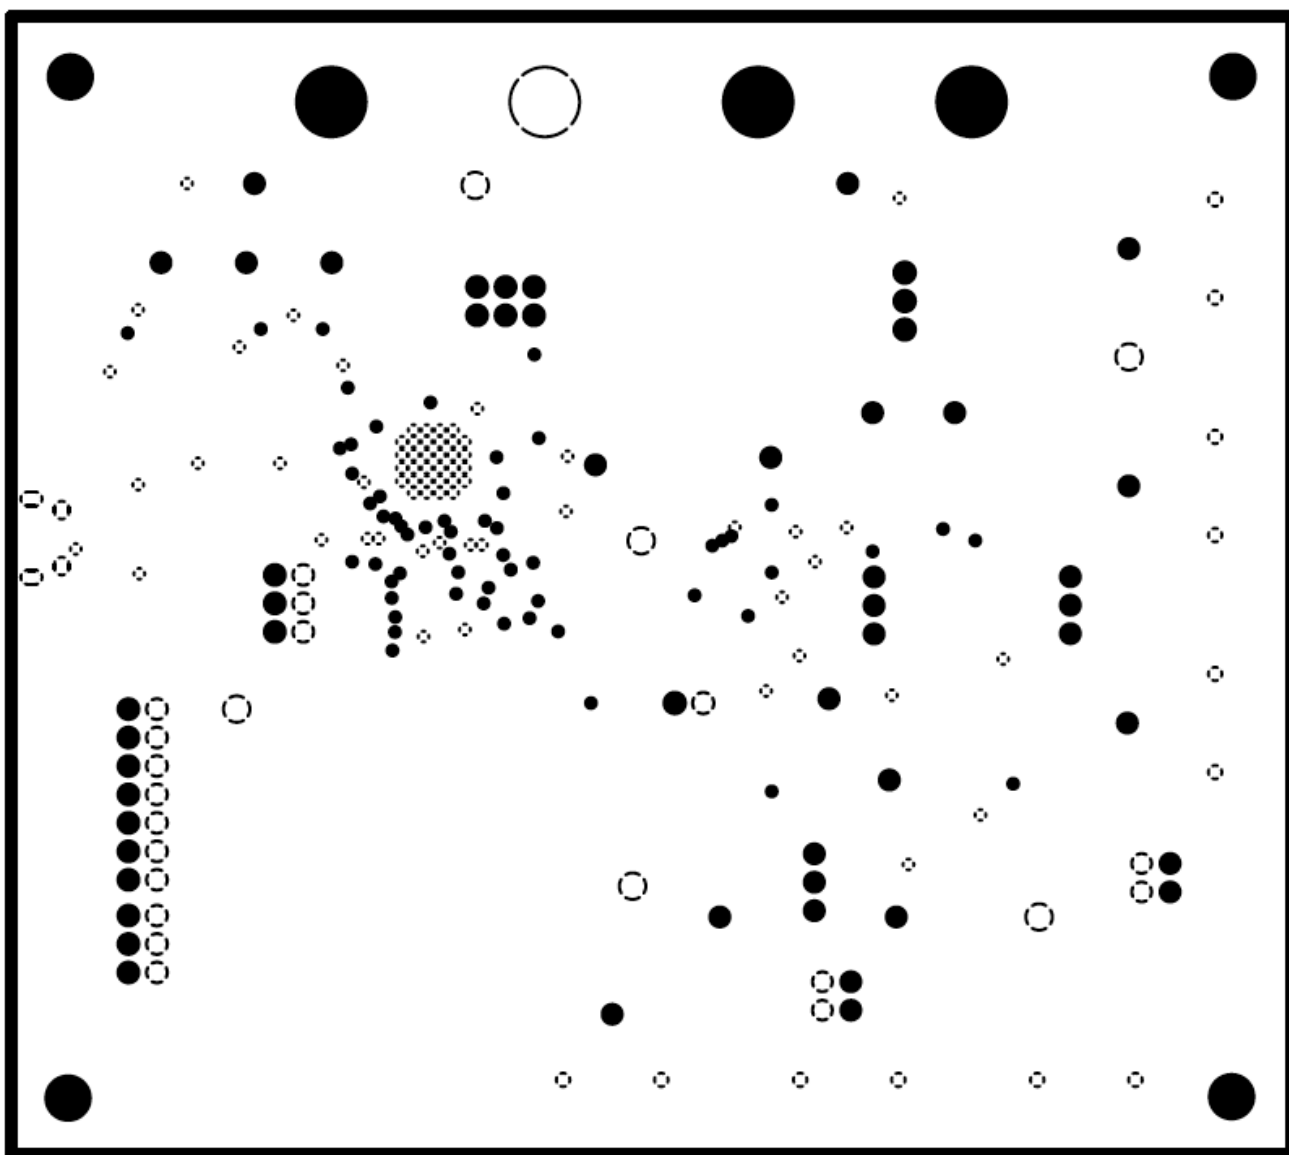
AFE881H1EVM PCB Mid Layer 1 Layout
